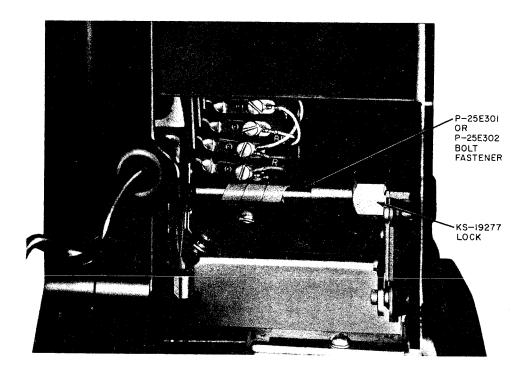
Cutaway Section of Upper Housing, KS-19277 Lock and Associated Parts, Completely Installed
